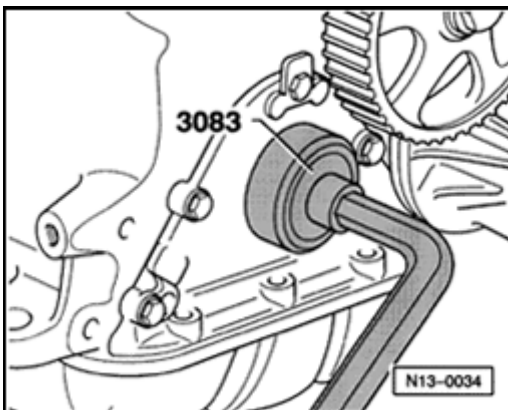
Pushing In Oil Seal As Far As It Will Go Using Thrust Sleeve And Bolt From 3083
